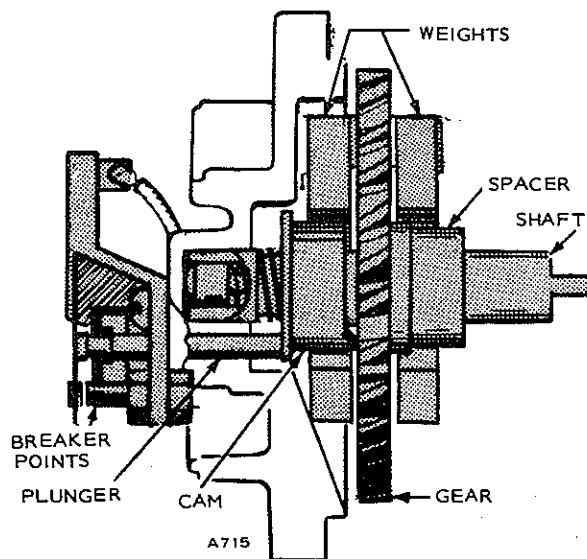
CENTRIFUGAL SWITCH ASSEMBLY
